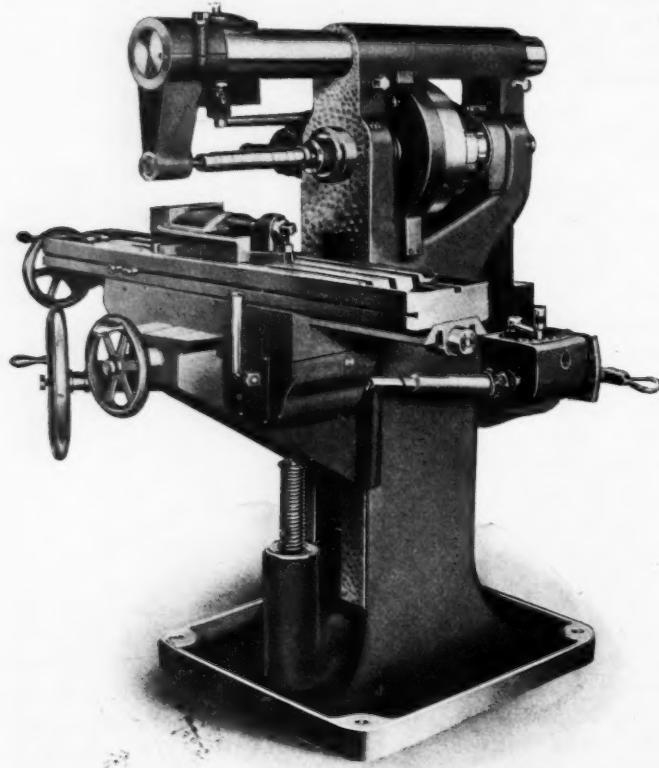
Plain Milling Machine built by the Grand Rapids Machine Tool Co.
